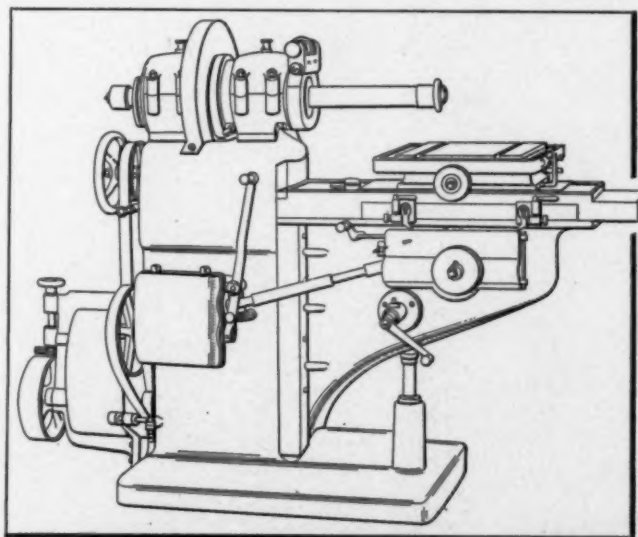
Type of cylinder grinder which should form part of the equipment of the up-to-date repair shop
